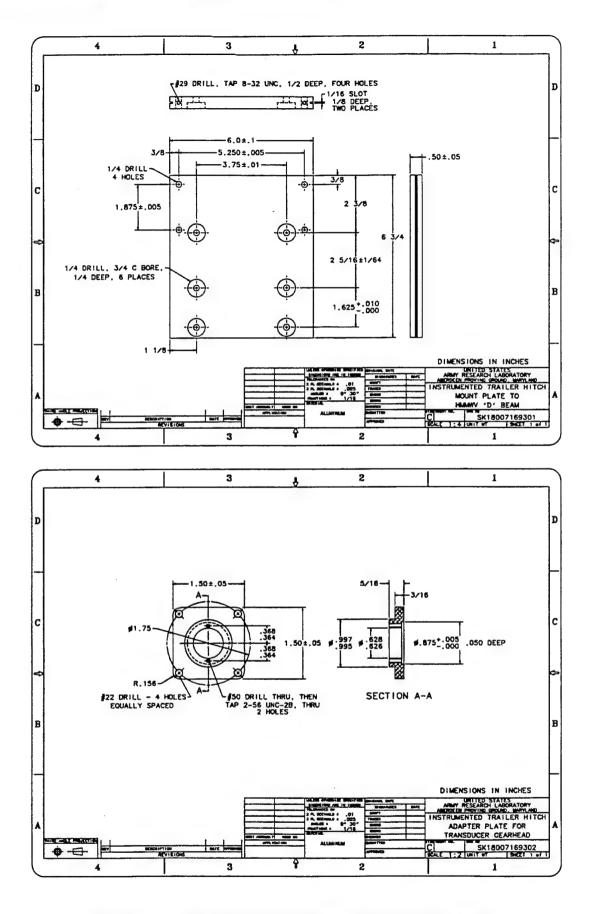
Beam Mount and Gear Head Adapter Plates.
